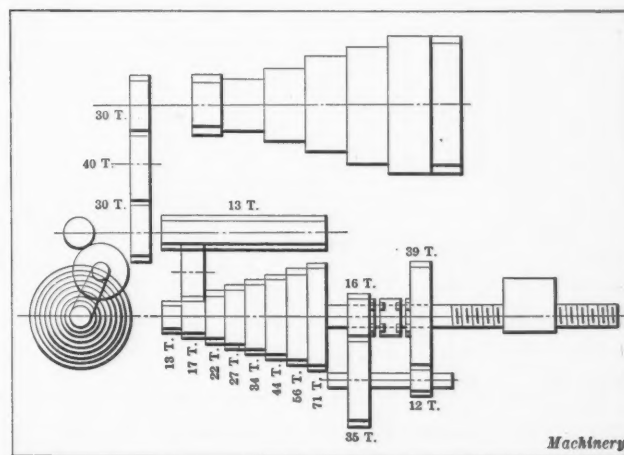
Sketch of Feed-changing Mechanism of Lathe
